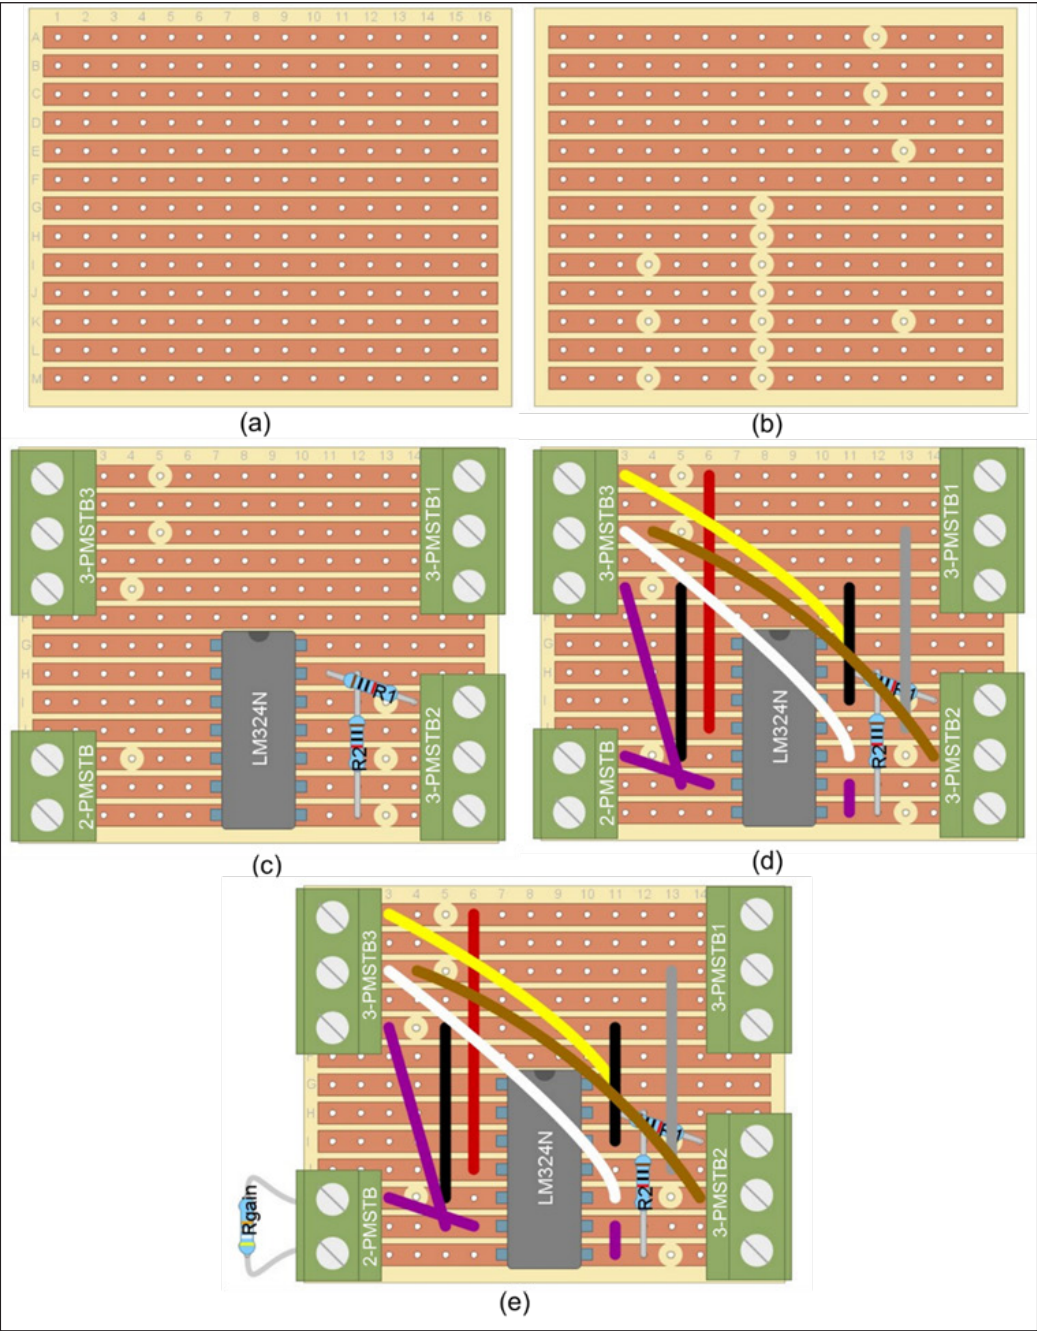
(a) Stripboard cutout dimension of 16 × 13 (front). (b) Breakage points (rear). (c) Placement of electronic component on stripboard (LM324N, R1 and R2, 3-PMSTB1,2,3, and 2-PMSTB2). (d) Placement of wires. (e) Placement of R_{gain}
